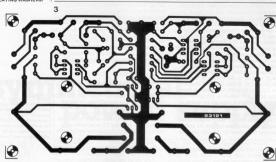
Component layout and trackside of the printed circuit board for the power supply. The two adjustable regulators must be fitted with heat sinks — DO NOT FORGET ISOLATING WASHERS!
